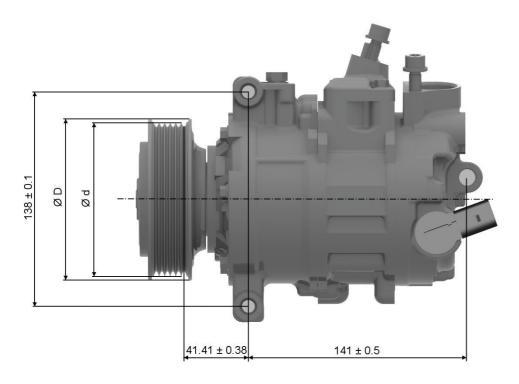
Dimensions of refrigerant compressor, pulley diameter 110 mm (side view)
